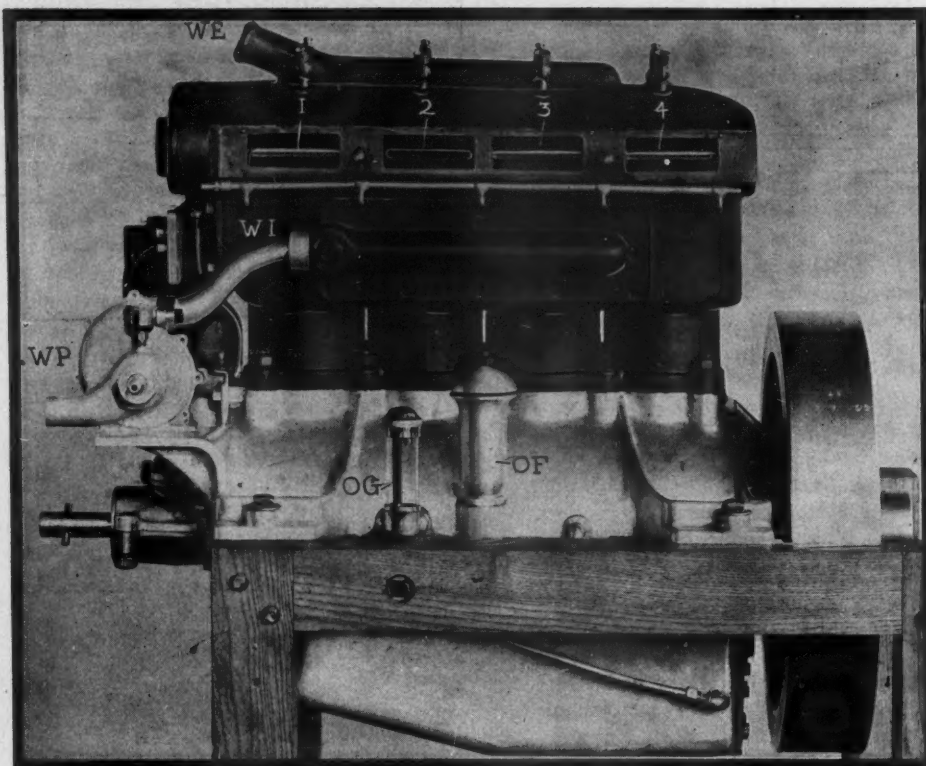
MEAD ROTARY-VALVE MOTOR; 1, 2, 3, 4, PORTS IN VALVE; OG, OIL GAUGE; OF, OIL FILLER; WP, WATER PUMP; WE, WATER EXIT; WI, WATER INTAKE
